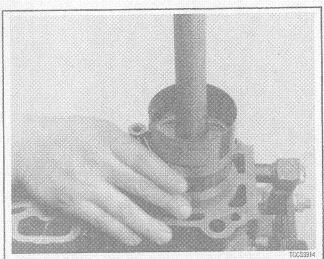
Install the piston and rod assembly into the block using a ring compressor and the handle of a hammer
